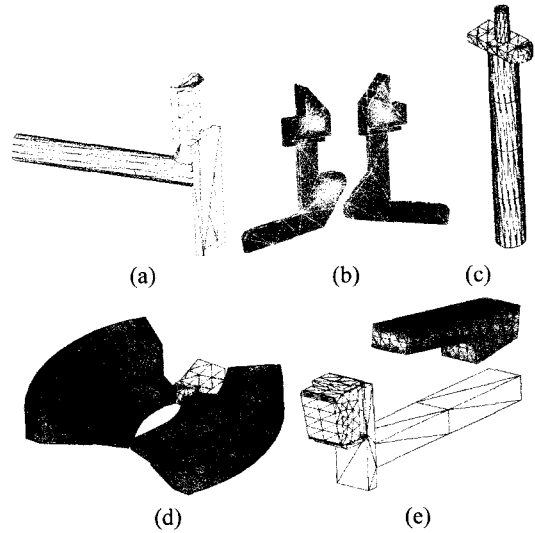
Finite element modeling of the parts of the heel/side lasting machine: (a) toe fix; (b) toe carriage; (c) Jack post; (d) wiper parts; (e) finger part
